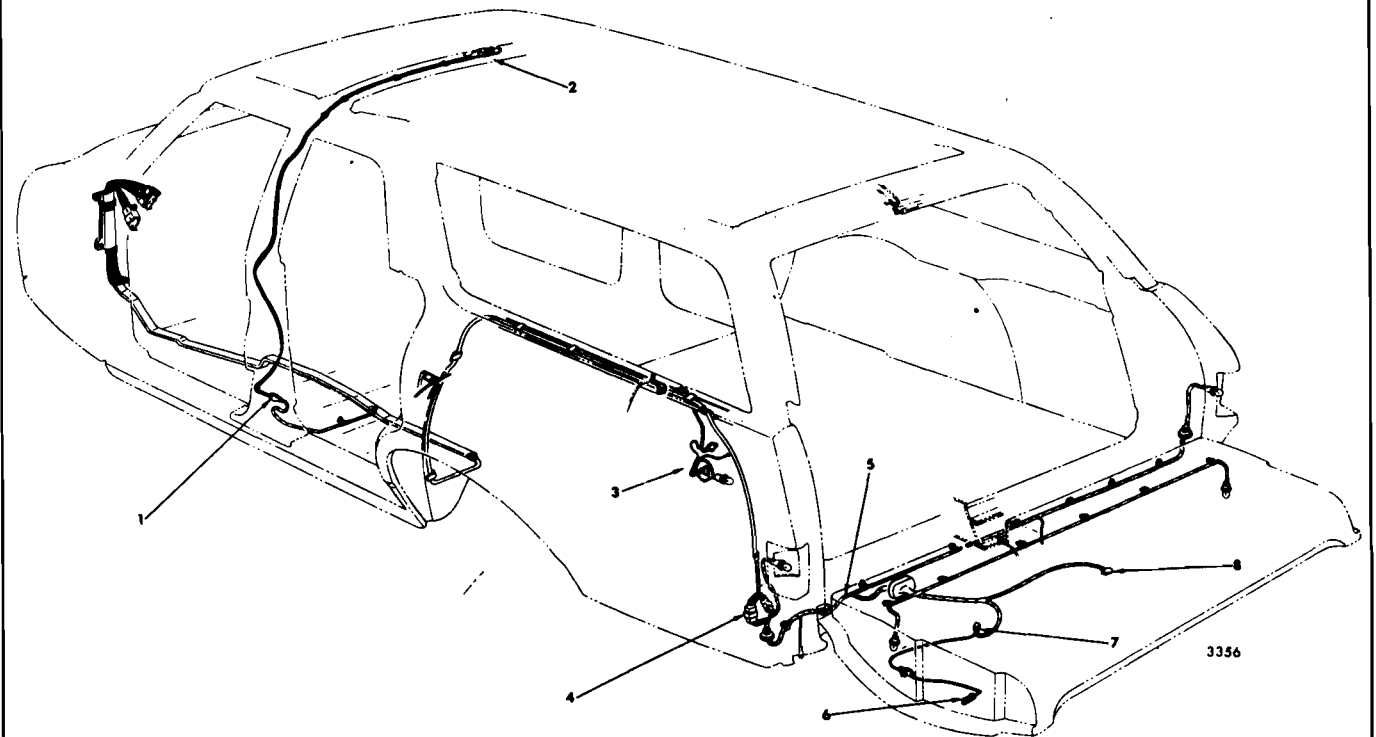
Wire Routing - Typical "A" Style Station Wagon with Single Acting Tail Gate
